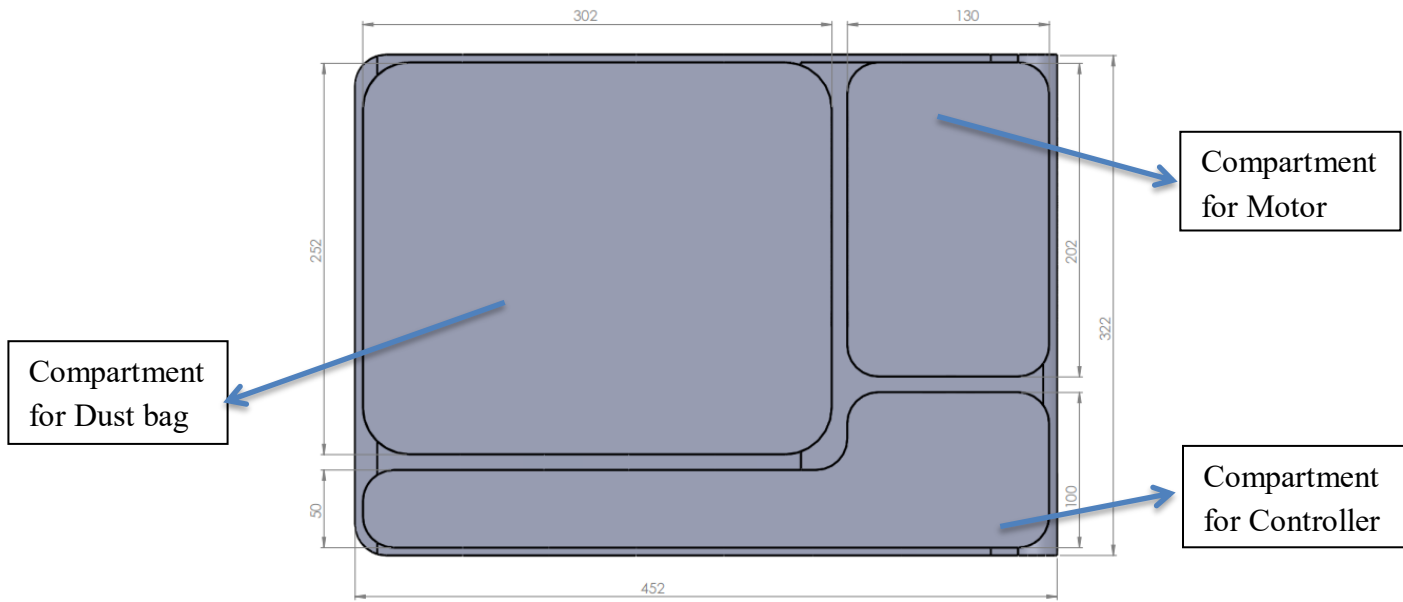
Top view of the vacuum cleaner compartment to house motor, dust bag and controller.
